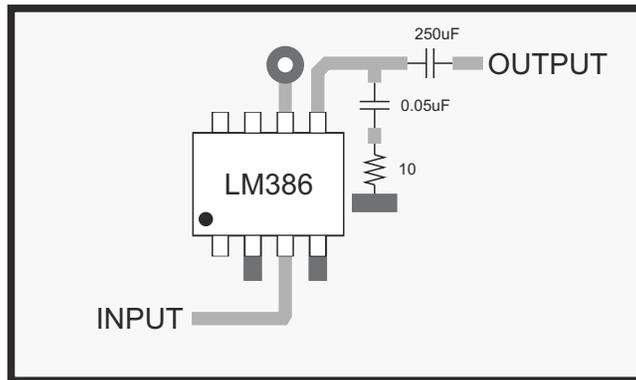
Layout Example for Minimum Parts Gain = 20 dB on PDIP package
